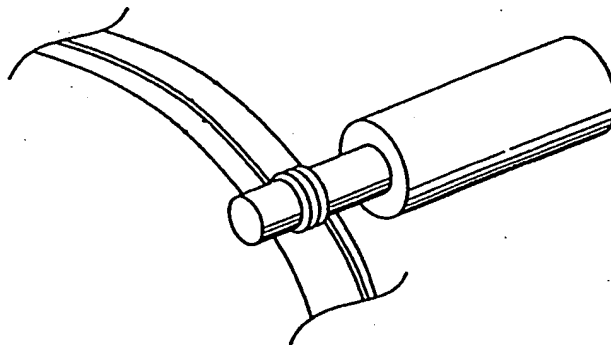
Cable used to couple a motor capstan to a ring in order to drive it. The cable must be terminated at its end in the ring which is being driven. As shown, the cable is frictionally connected to the motor capstan.
